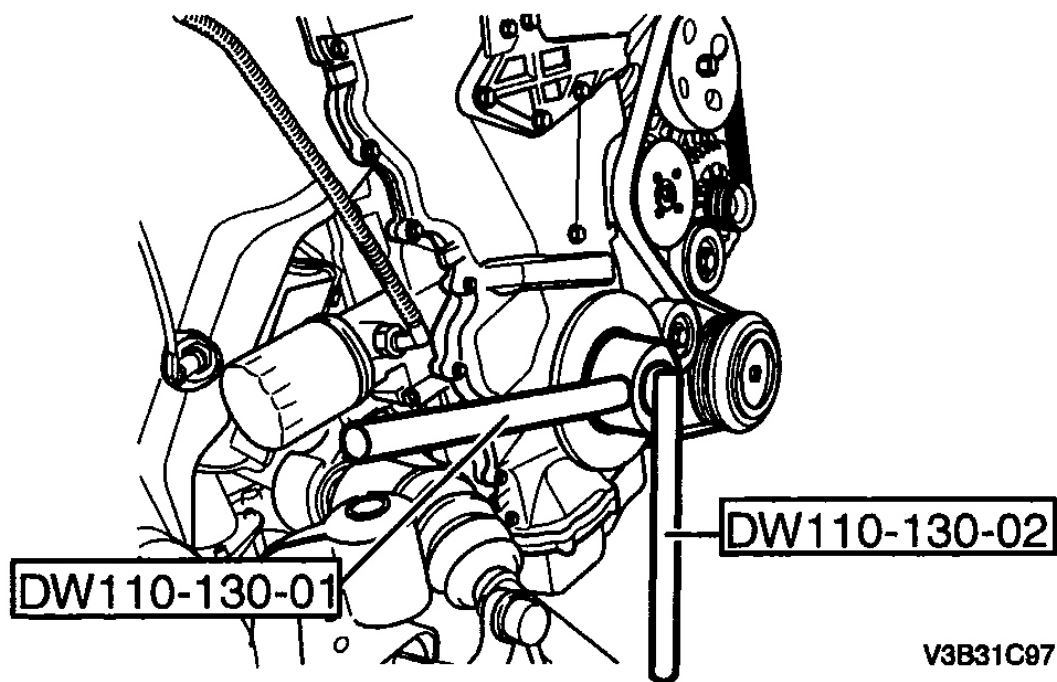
Removing Crankshaft Pulley Bolt Using Crankshaft Pulley Installer/Remover DW110-130-02
